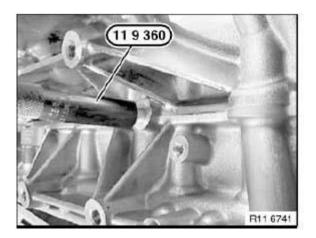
Identifying Special Tool 119 360 Courtesy of BMW OF NORTH AMERICA, INC.
